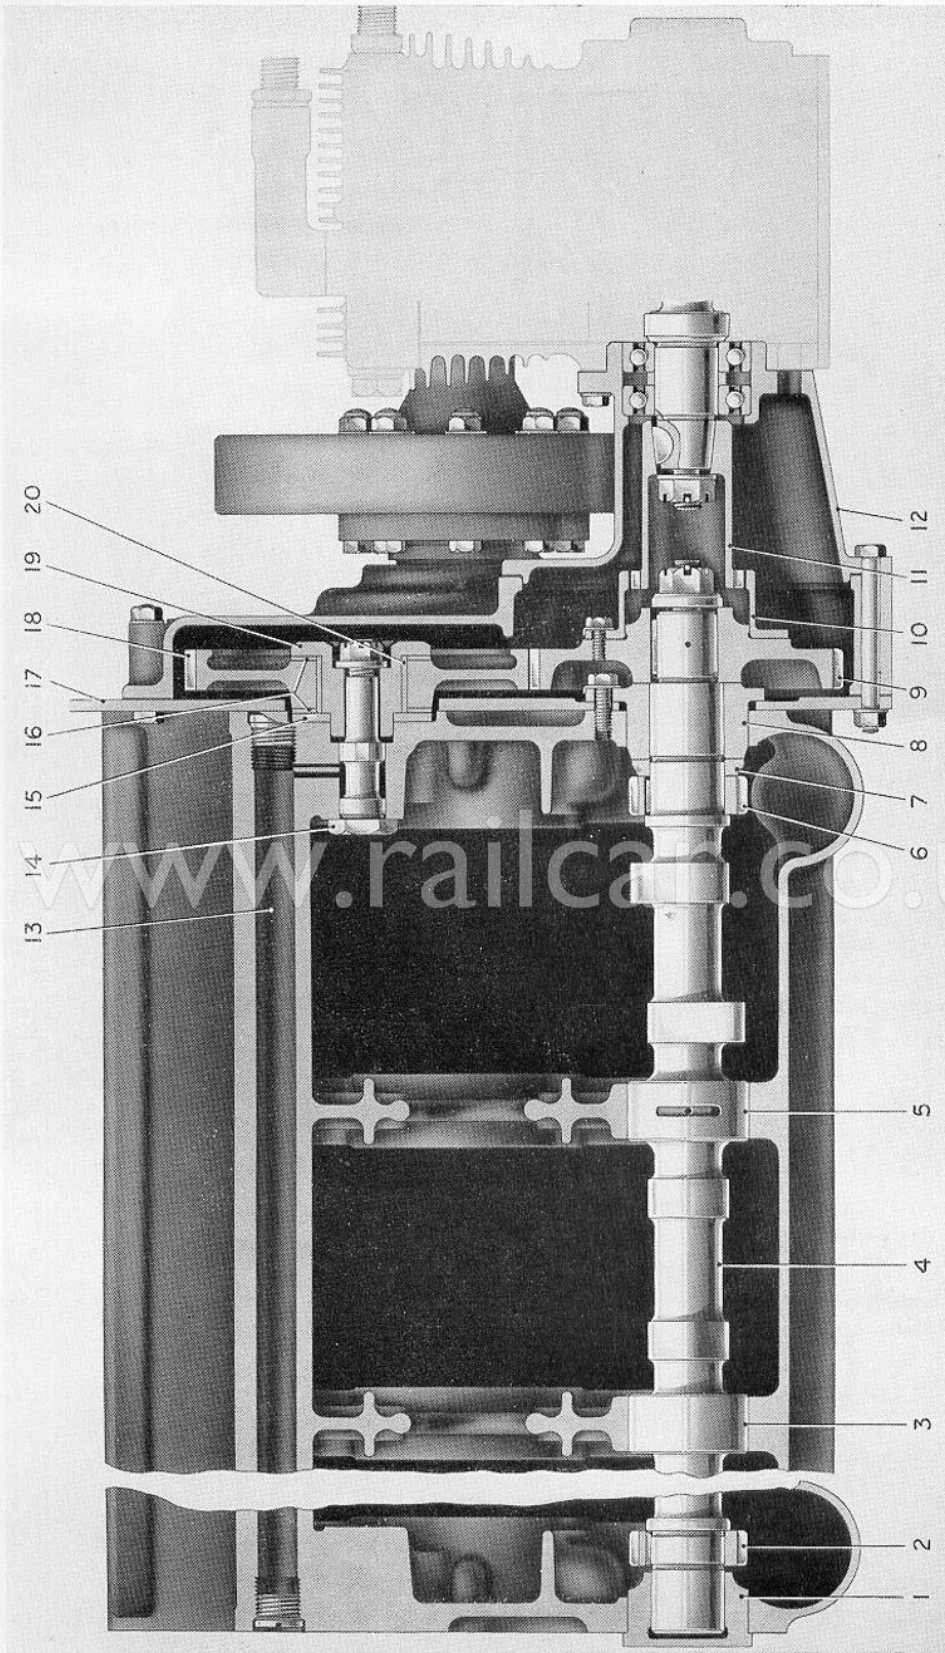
ARRANGEMENT OF CAMSHAFT AND IDLER GEAR
